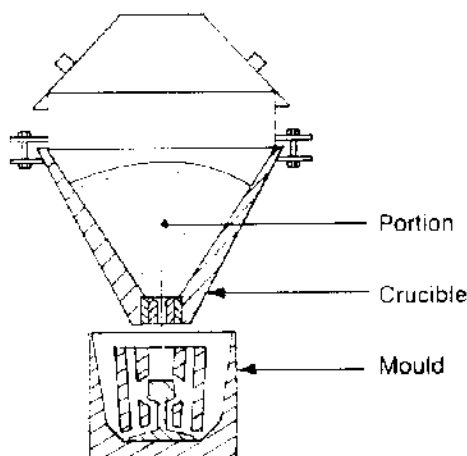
ALUMINOTHERMIC WELDING
